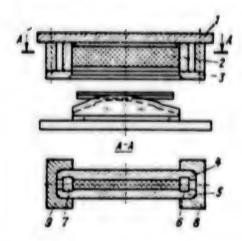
Diagram of a component container with a graved chamber with dimensions of 1,000 X 60 mm: 1 - upper plate; 2 - Elastic agent; 3 - Support plate; 4, 5 - Lengthwise wall; 6,7 - Pront wall; 8,9 - Clamp
